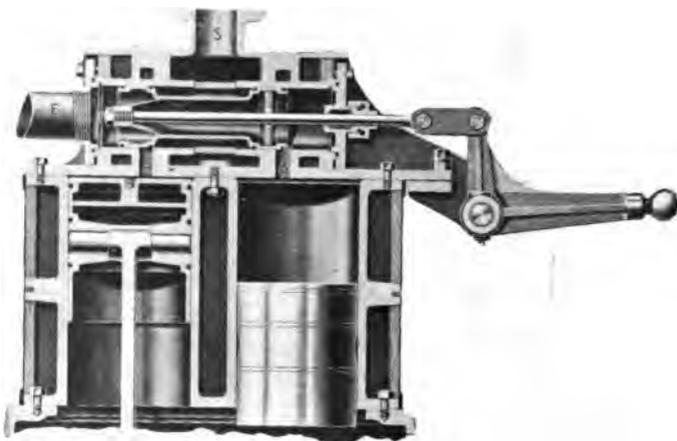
DETAIL SHOWING STEAM CHEST, CYLINDERS, VALVE AND PISTONS OF WESTINGHOUSE "JUNIOR."
